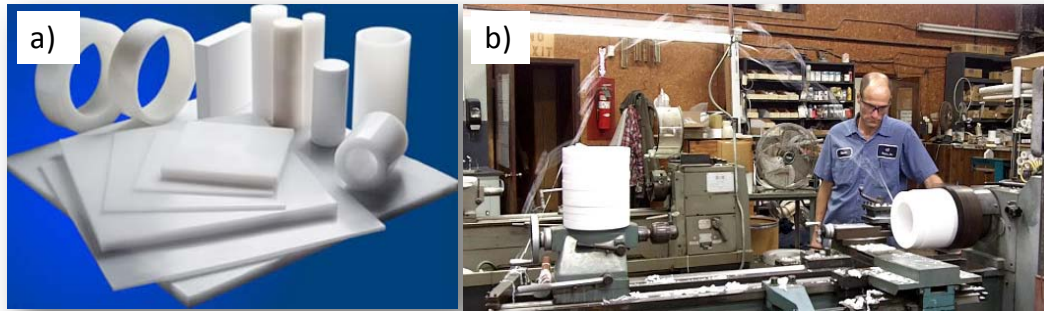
a) Machined PTFE pieces. b) Process of machining a pipe made of PTFE.
